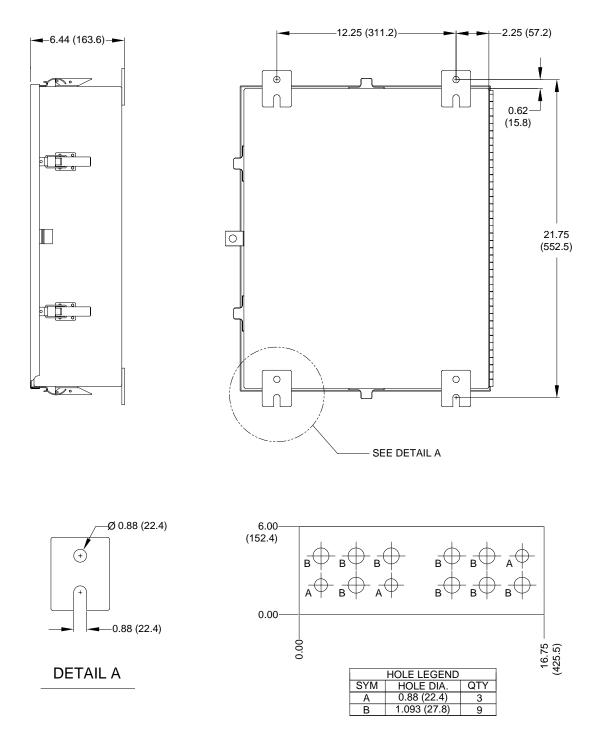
SC 370 Mounting and Outline (Stainless Steel Option)
